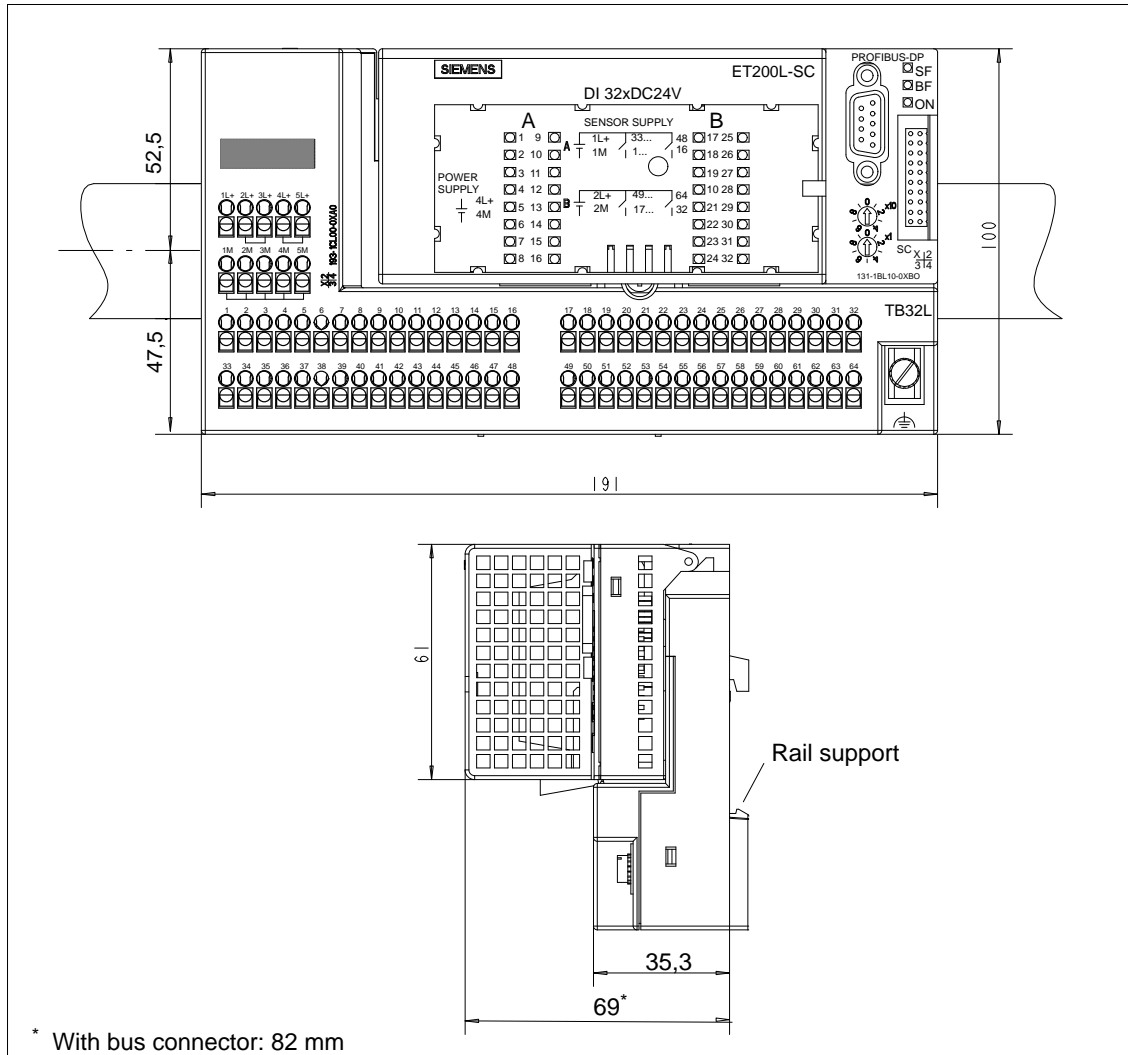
The TB 32L Terminal Block with the Electronics Block Clipped On, Dimension Drawing
